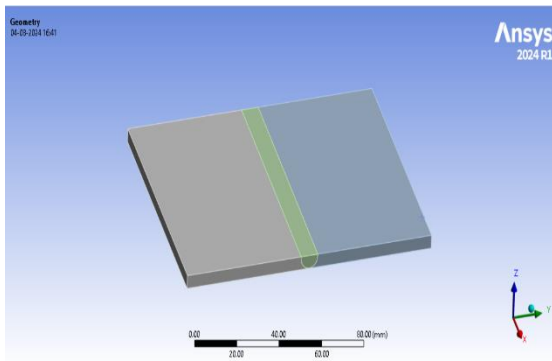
Imported model AA6351 aluminum alloy welded plate
